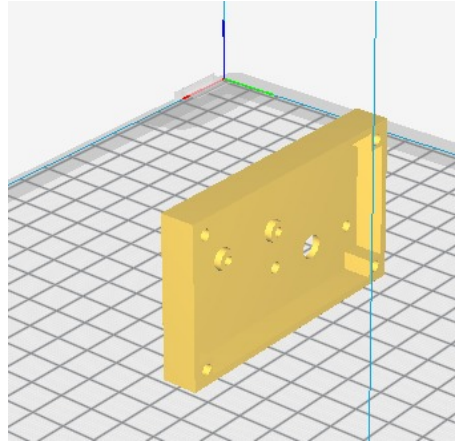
Version of the original intended gearbox for the robot. The gearbox ensures that the wheels move with the motor drive. Designing of such a gearbox turned out to be such complex that eventually a prefab was chosen for the Gearbox.
